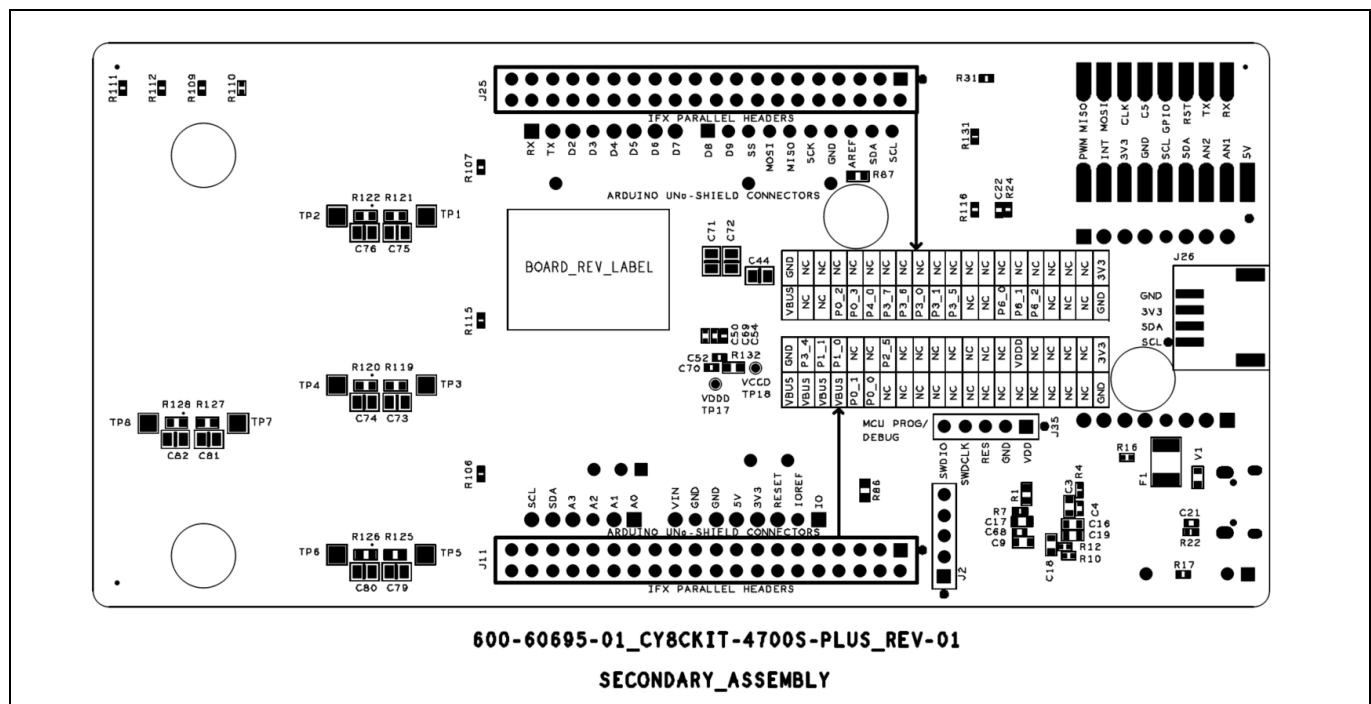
CY8CKIT-4700S-PLUS kit assembly drawing (bottom view)
